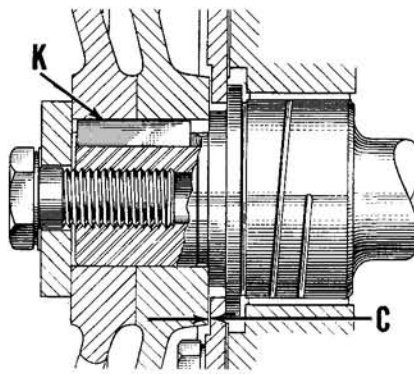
Timing gears on later type camshaft are retained by cap screw, lock washer, plate and key (K). Camshaft end thrust is controlled by engine front plate which fits between rear camshaft gear and shoulder on camshaft. Clearance (C) should be 0.005-0.021.
